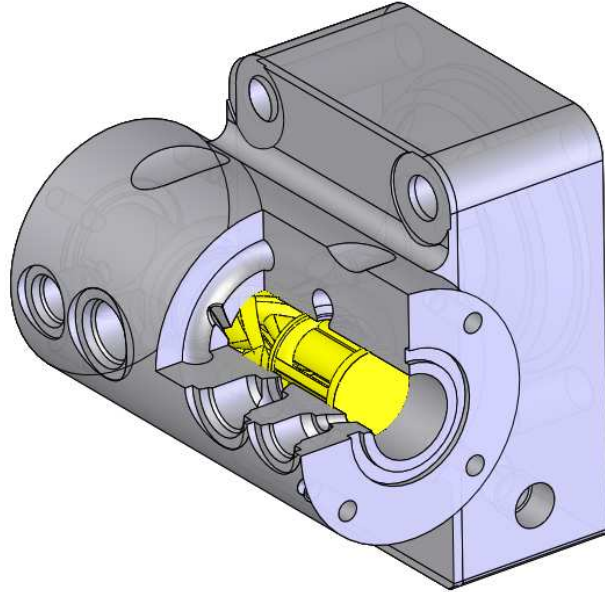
Cutaway rendering of rotary spool/sleeve assembly
